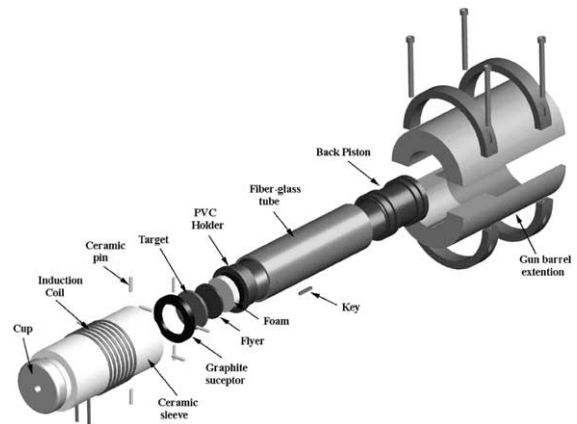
Exploded view of projectile and target assembly. The copper shield, alignment rings and velocity system are not shown.
